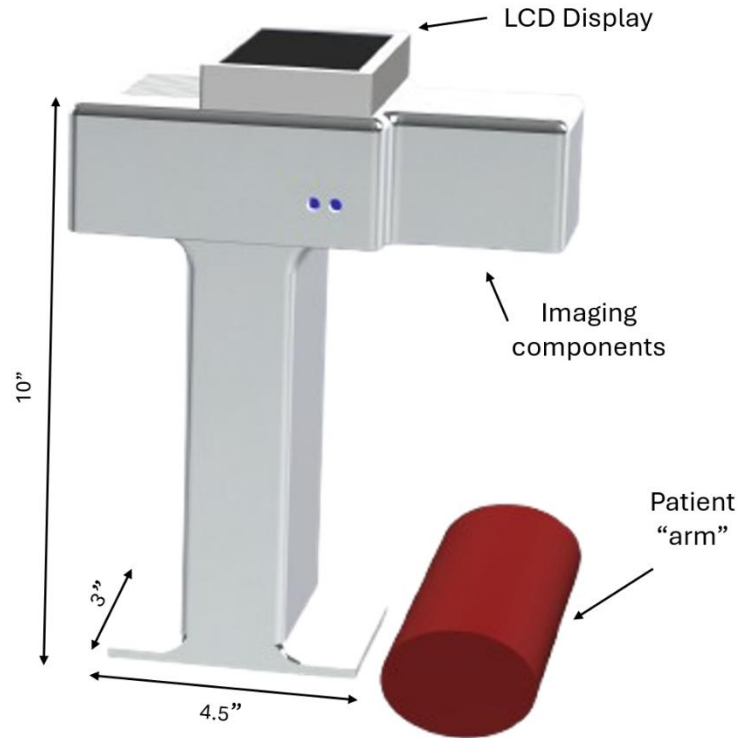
Initial mechanical prototype (unstable straight-arm version).
